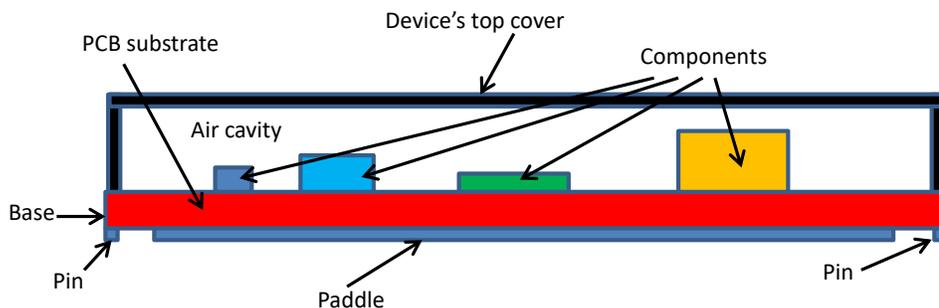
Cross section of a typical air cavity LGA package (bond wirings not shown)
